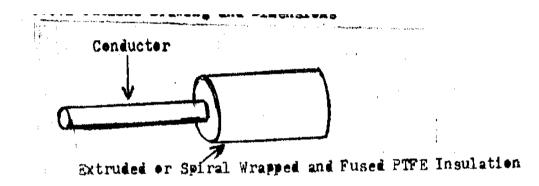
Outline Drawings for Pattern WH3F – 1A
